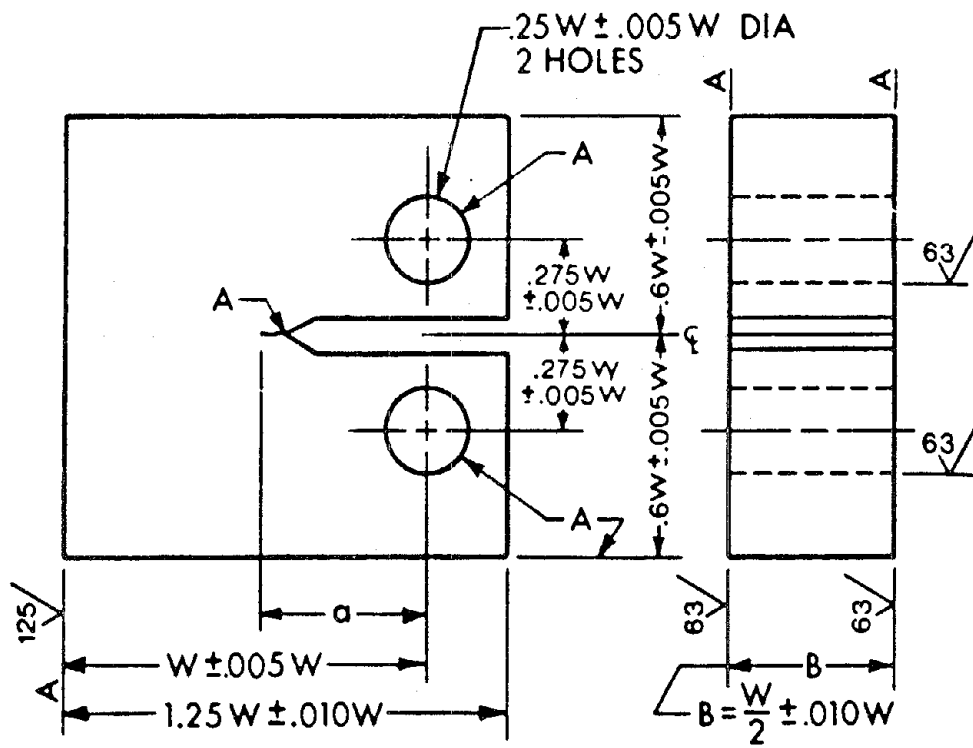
Compact tension fracture toughness specimen geometry. (Schematic.)
